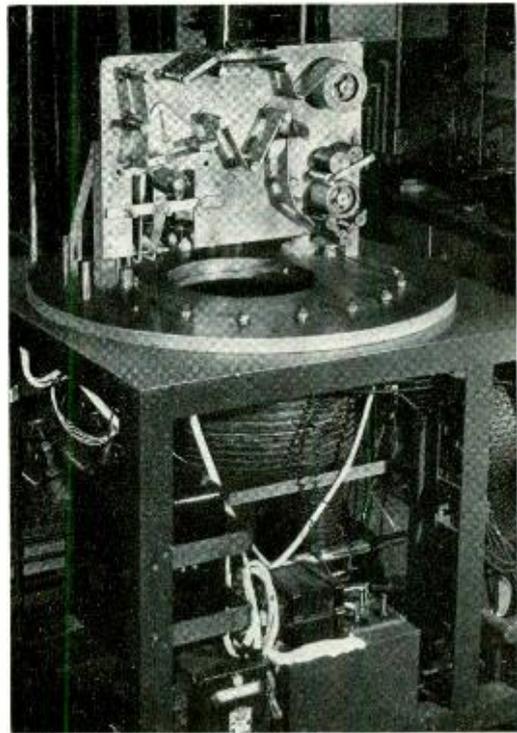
Vacuum vapor-plating machine with bell jar and side panel removed. The plating occurs in the upper section normally covered with the evacuated bell jar. Below are located oil diffusion pumps, transformers, speed control and the water-cooling coils
